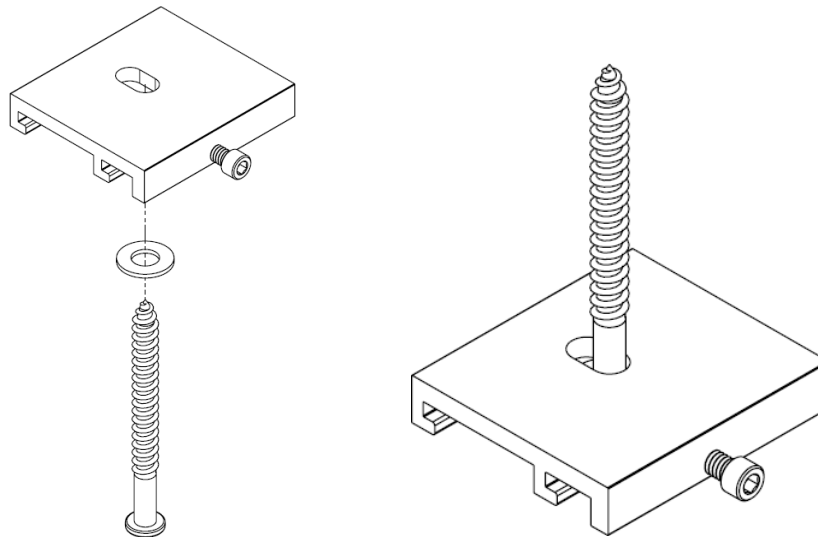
Structural Wood Screw, Flat Washer, and Bracket Assembly
